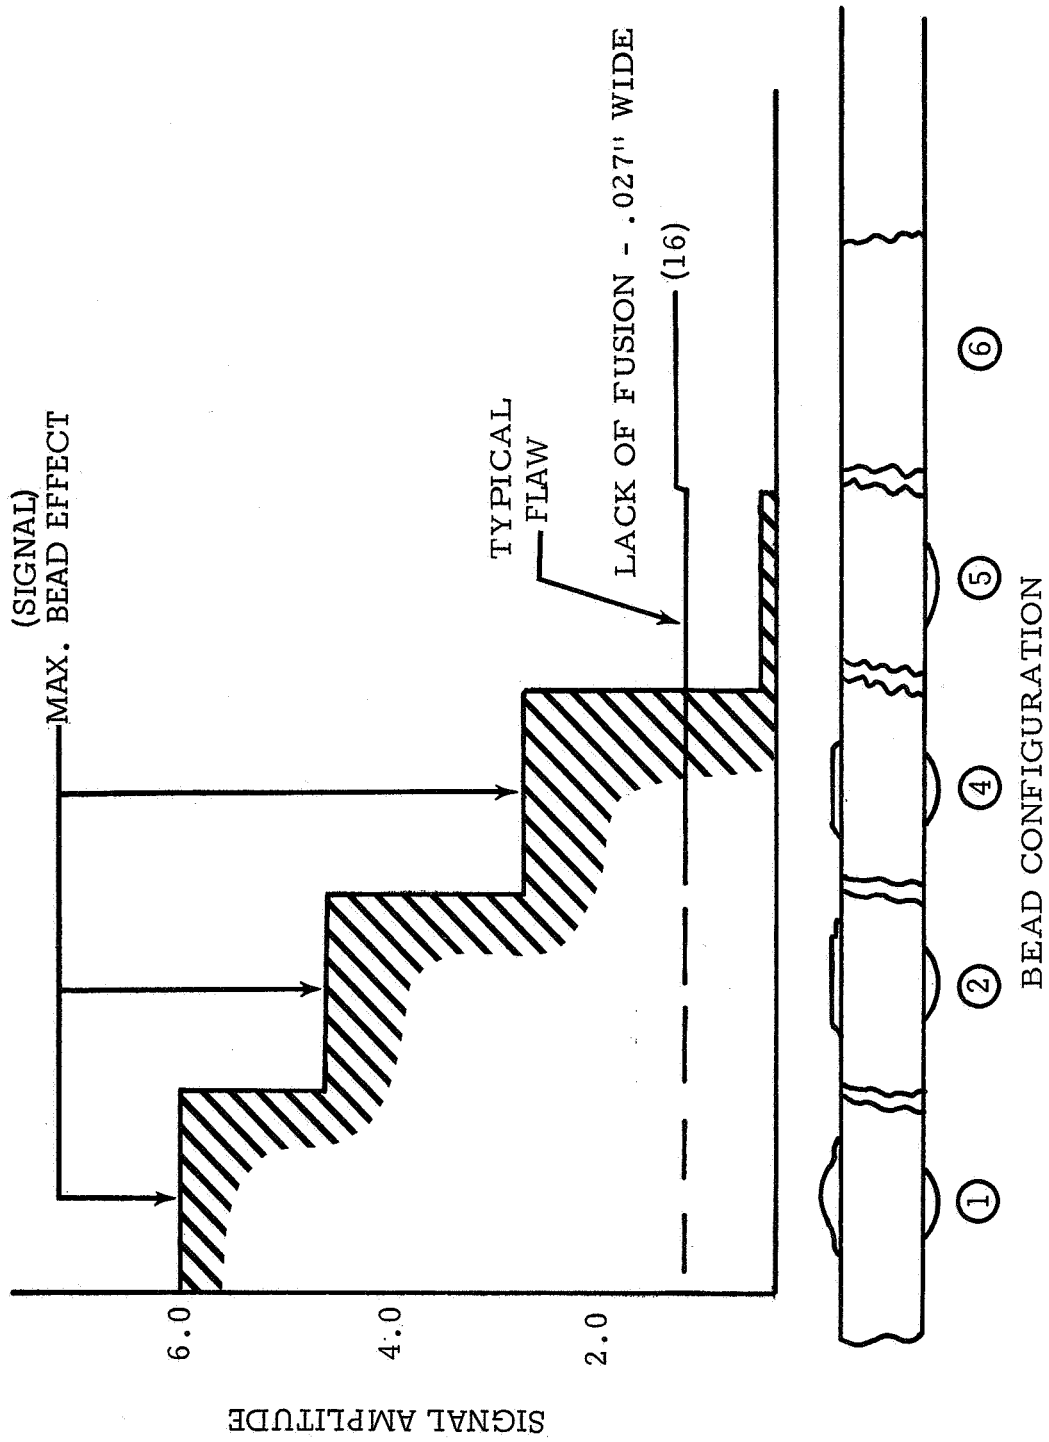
Weld Bead Interference - 0.50 Inch Weld
